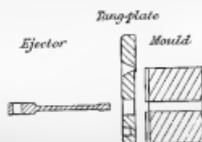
Typograph; mould, tang-plate and ejector. Section.
